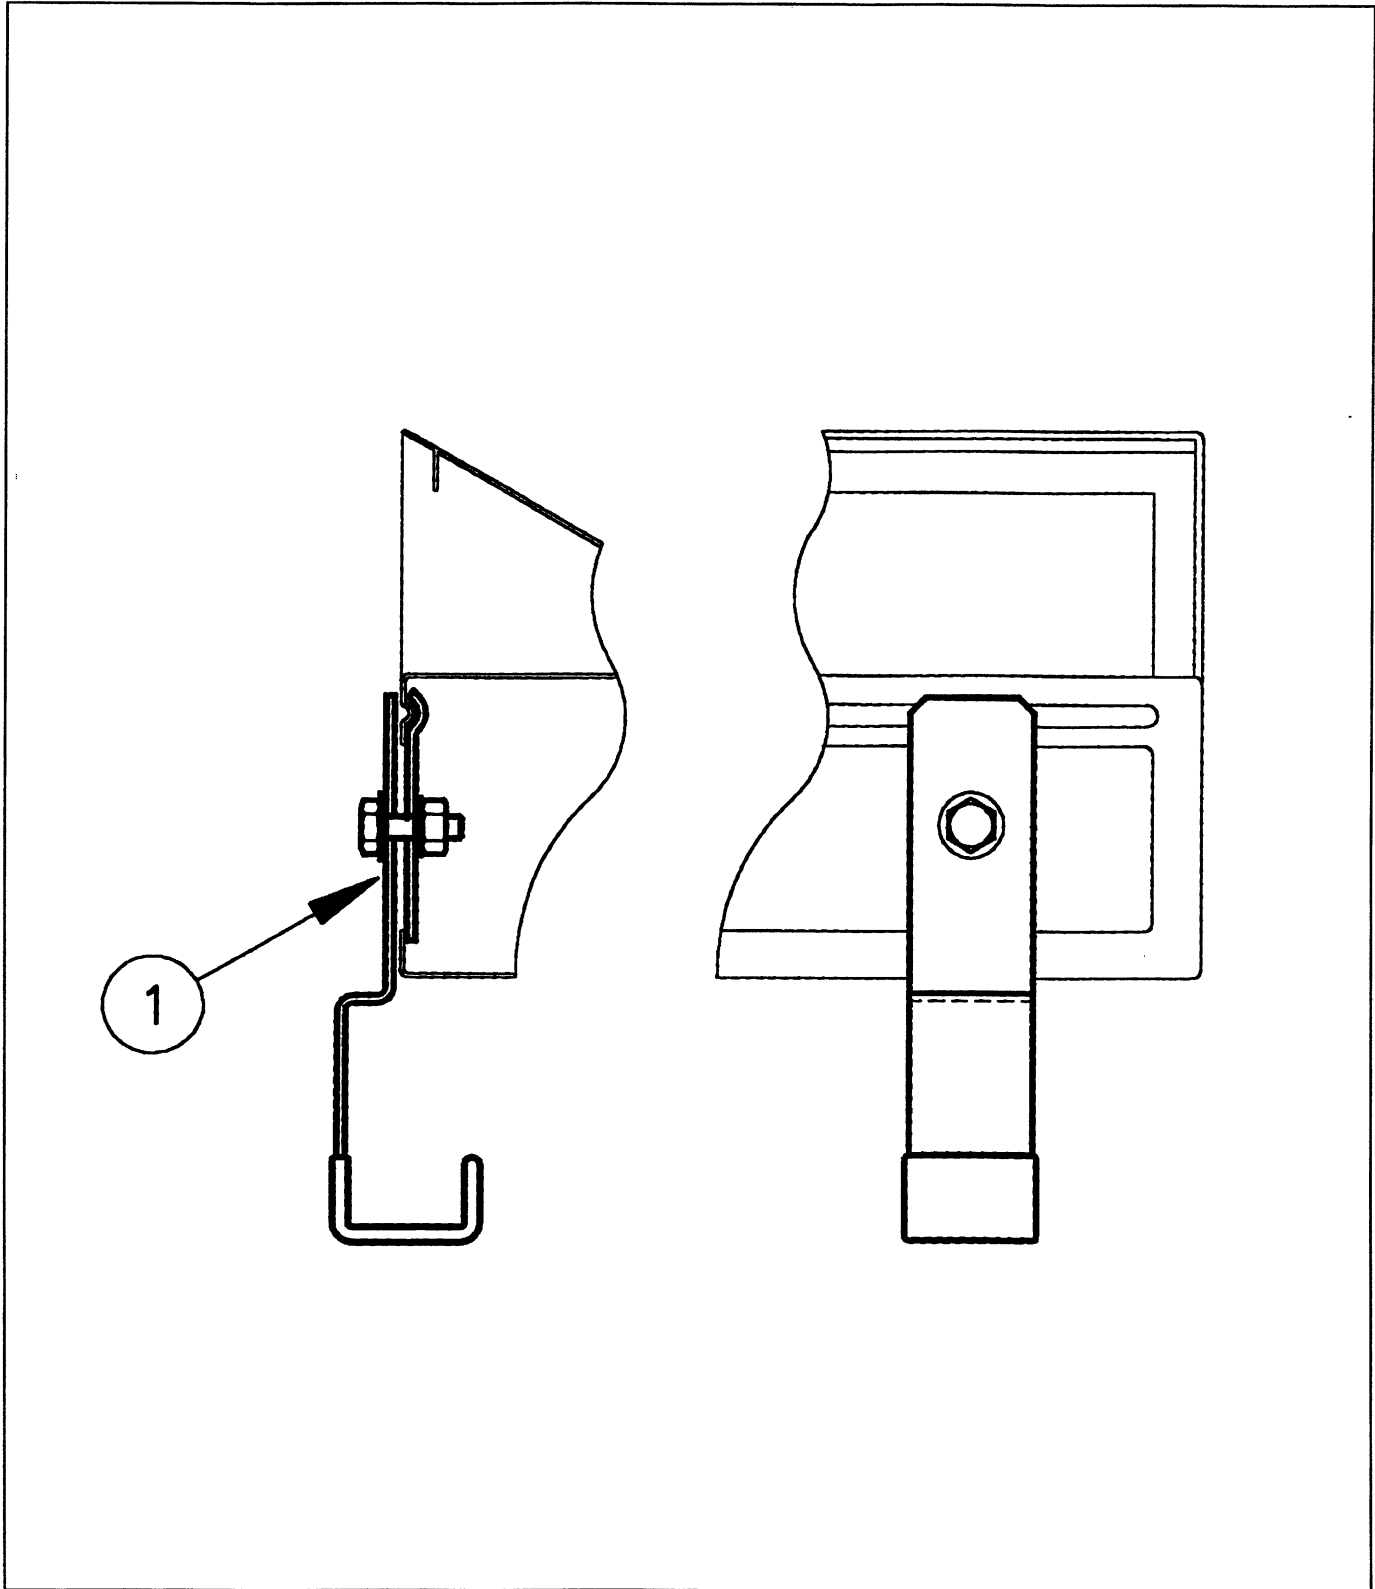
(Sheet 1 of 2) Bracket Mounting, Headset
